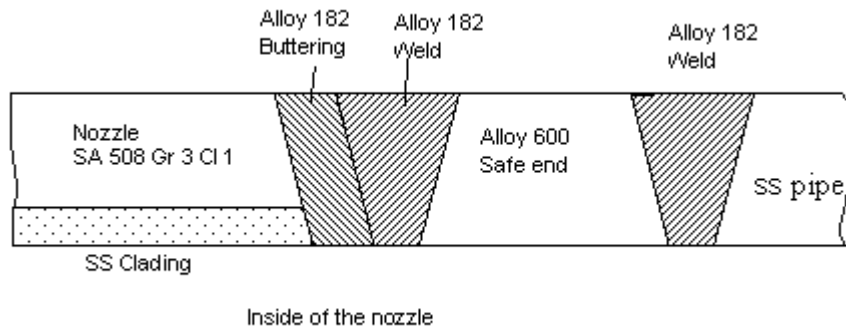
Principal configuration of nozzle to safe-end weld and safe-end to connecting stainless steel pipe weld.
